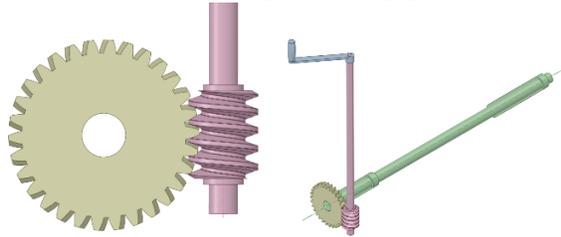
Worm and Pinion gears used in the design and arranged to the crank
